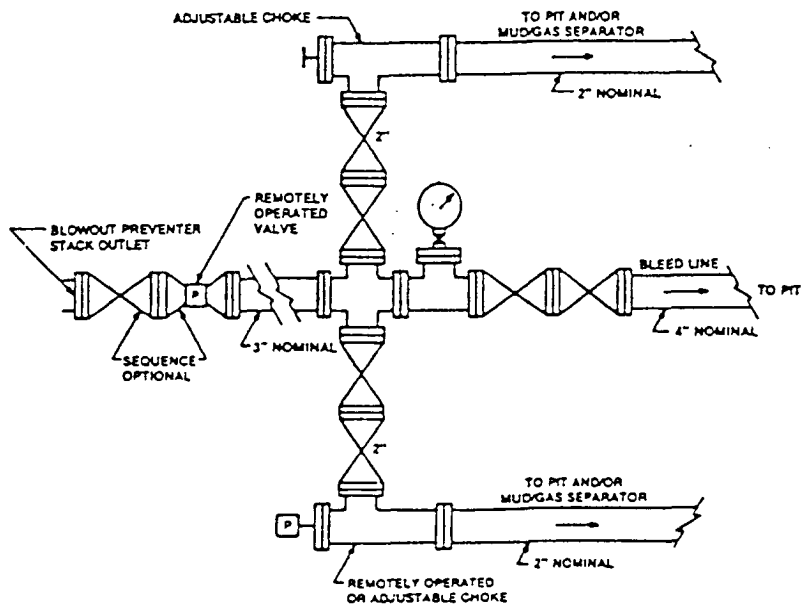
Typical choke manifold assembly for 5M rated working pressure service — surface installation.
